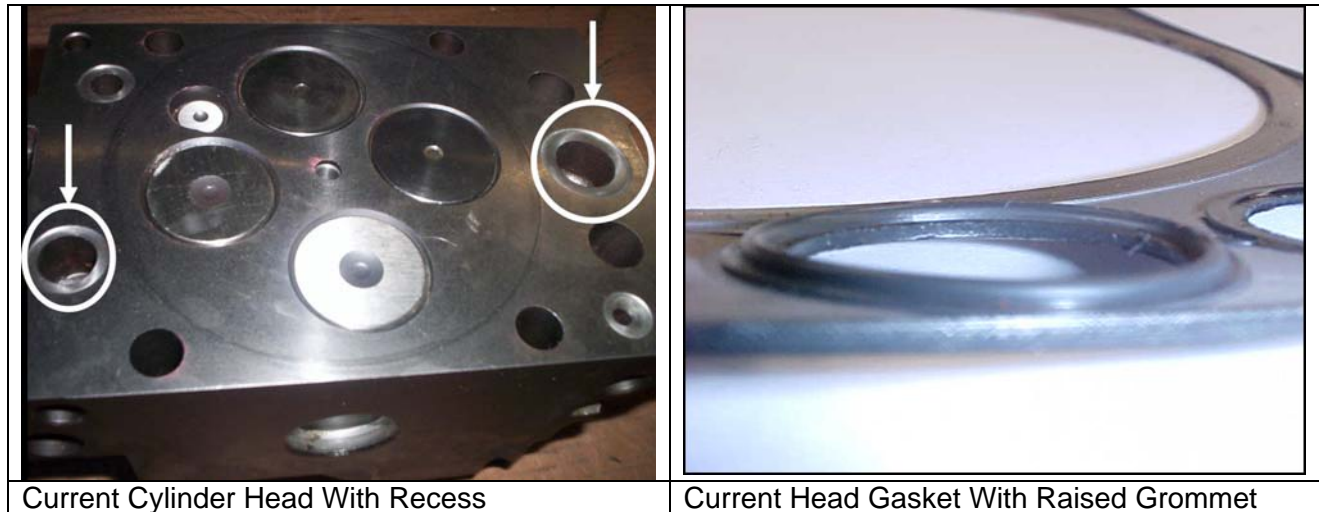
MBE4000 Cylinder Head Recess and Head Gasket Grommet
